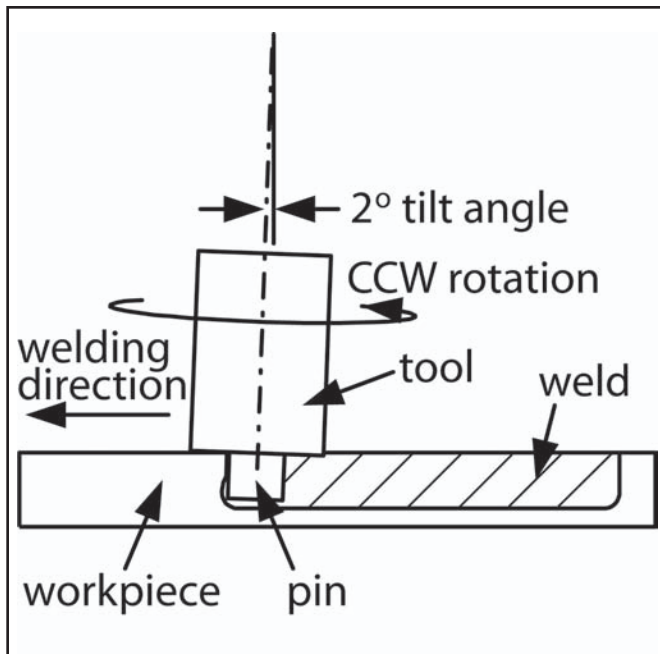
Friction stir welding of aluminum Alloy 2219.
